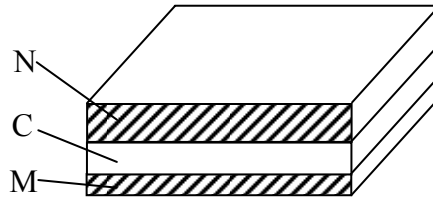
Asymmetrical sandwich: M - accelerated plate; C - explosive; N - tamping layer.
